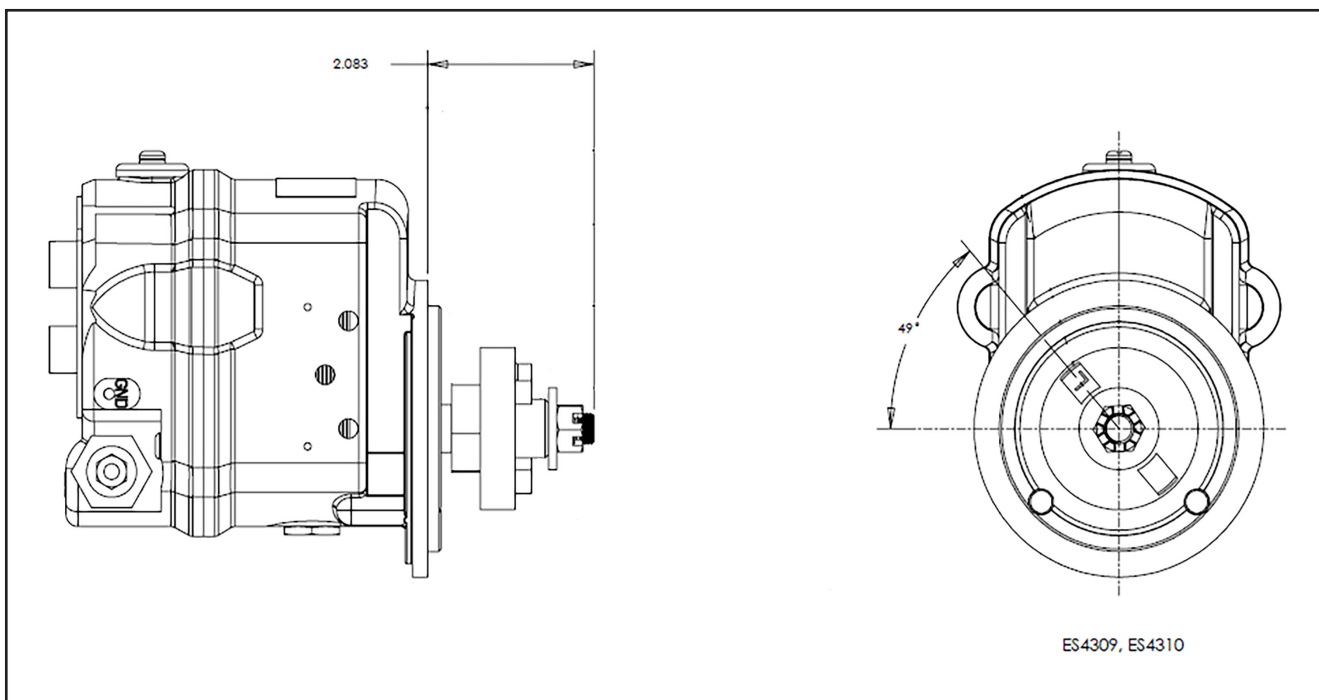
ES4300 Drive Type A Dimensions –
